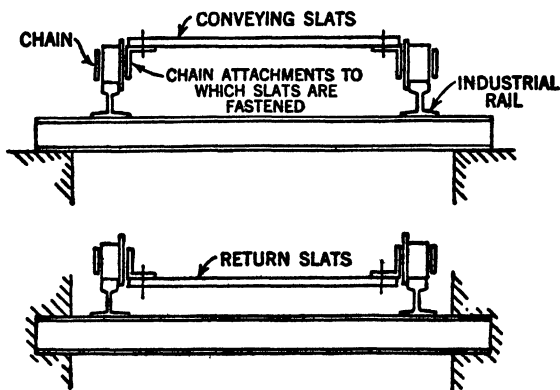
Section Through Slat Conveyor with Flanged Rollers
